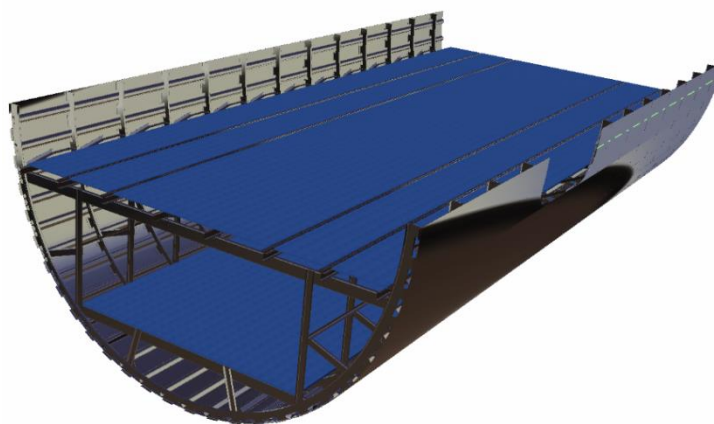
Overview of the MultiFunctional Fuselage demonstrator lower half and welded joints
